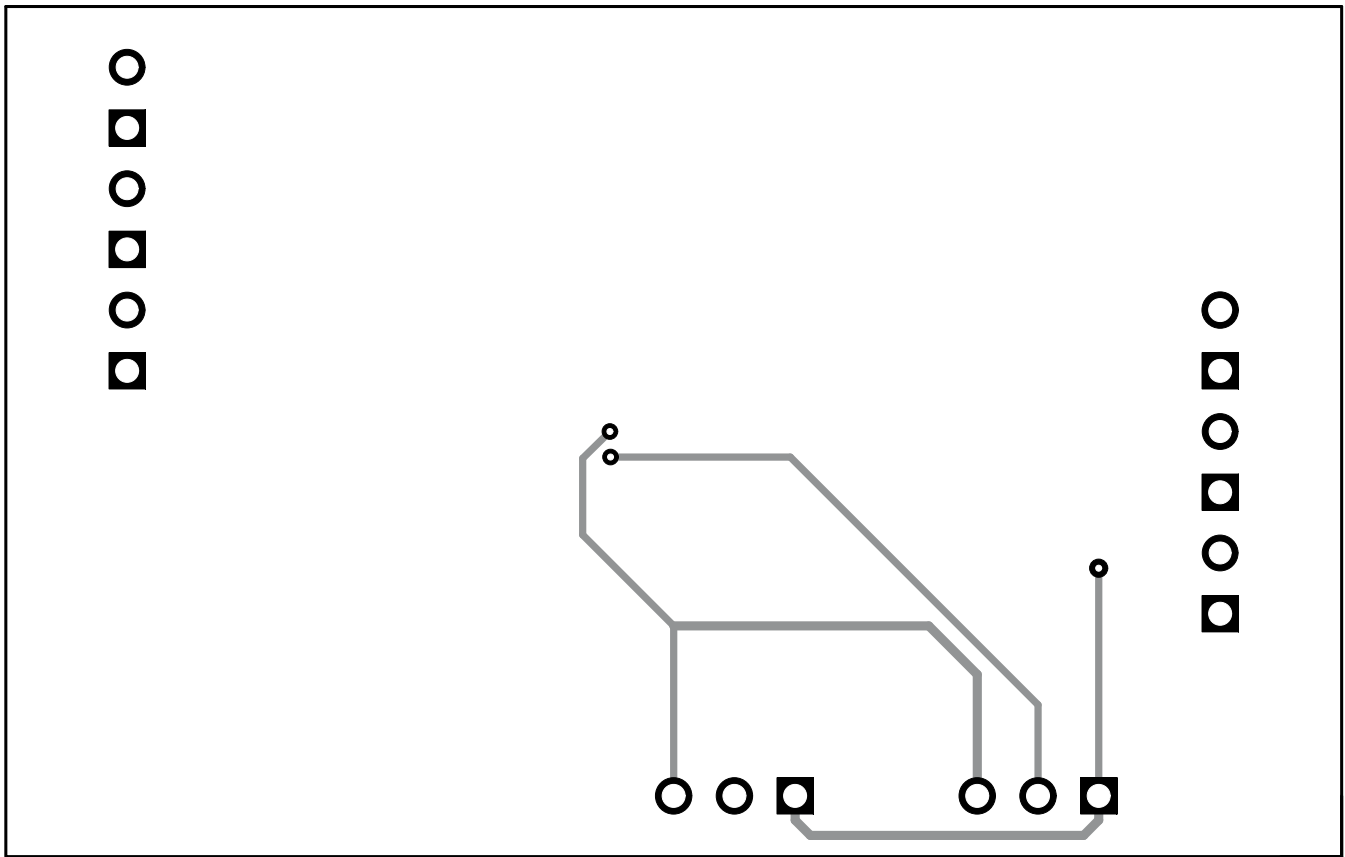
TPS626xxEVM Bottom-Side Copper (Bottom View)
